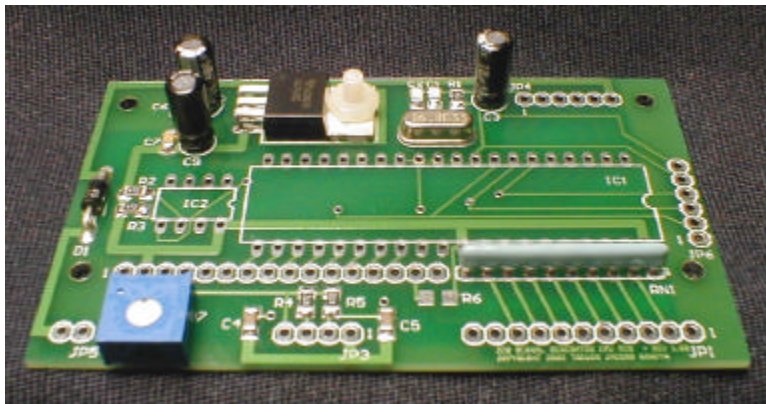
Front view of CPU board after through-hole components have been installed. (R6 still missing - an error)
